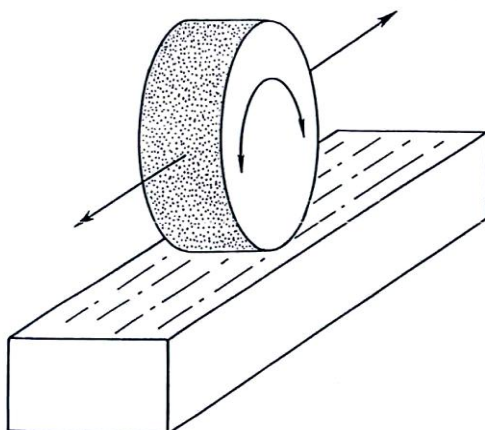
Surface Grinding Parallel to the Specimen Longitudinal Axis
